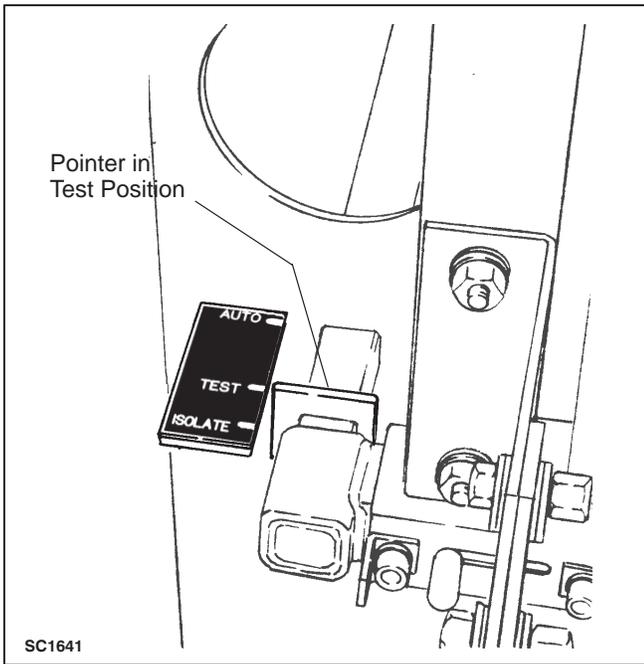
1600–3000 AMP DRAWOUT POSITION POINTER
